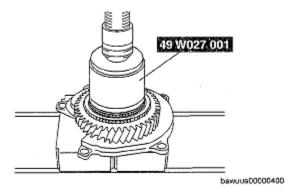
Installing Counter Drive Gear With Tapered Roller Bearing Courtesy of MAZDA MOTORS CORP.
